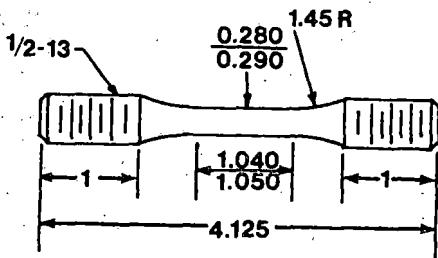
Low Cycle Fatigue Test Specimen. Dimensions in inches one inch = 25.4 mm
